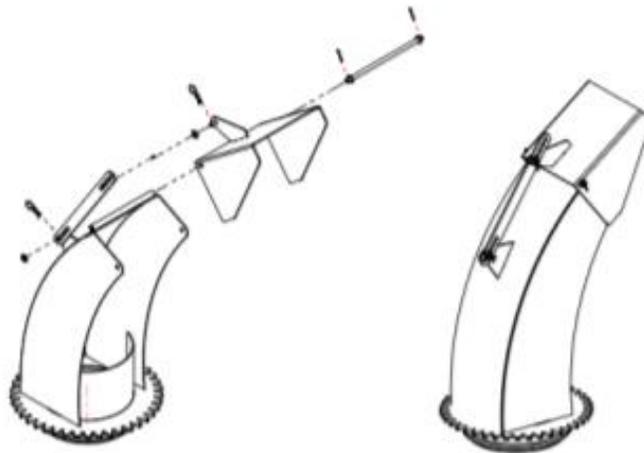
Discharge Chute Assembly, Snow Spray Mask Assembly, and Fittings 1
